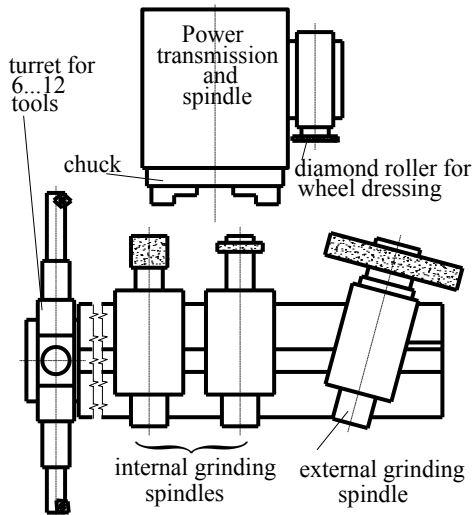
Scheme of the working area of a combined machine-tool for machining disc-type components (Schautz "Kombi Grind" [1])
